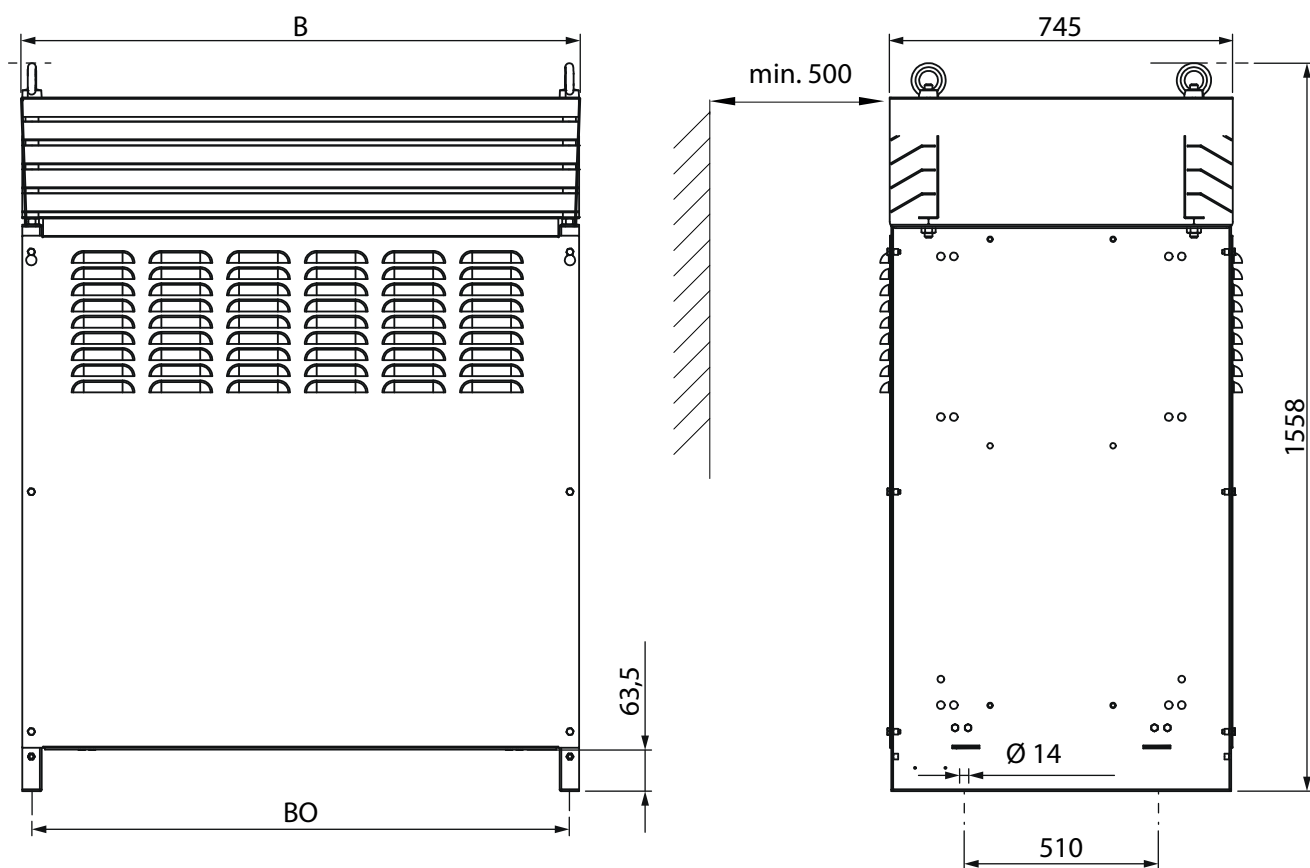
Resistor cabinet SWLR (dimensions in mm, weight in kg)
